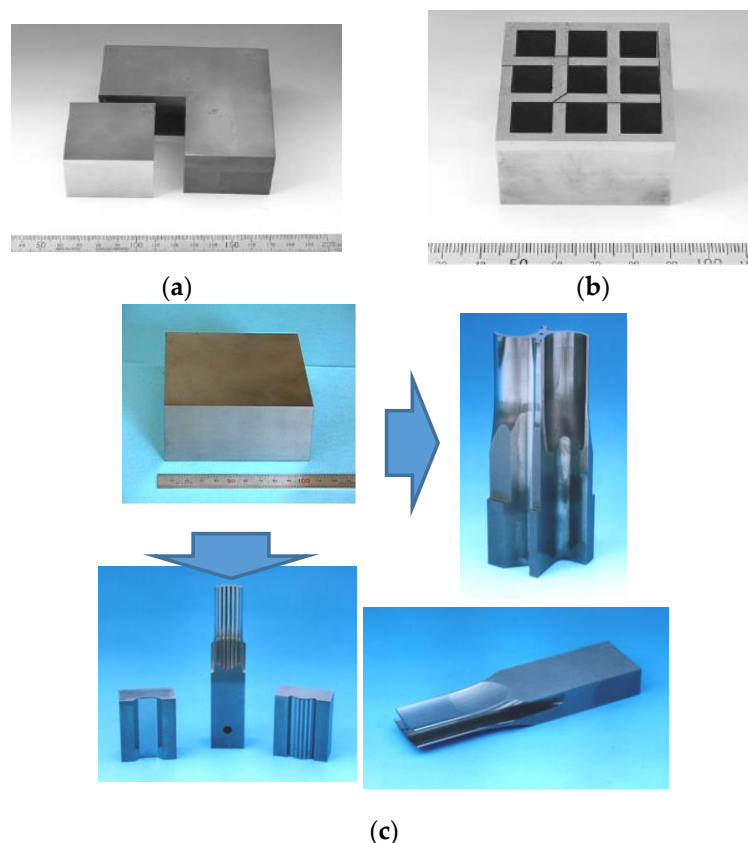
Example of press stamping die and punch made of WC/Co FGMs for electronic components: (a) single cut example by wire-cut EDM; (b) multi cut example by wire-cut EDM; (c) Examples of finished press stamping die and punches from large sized WC/Co FGMs material.
